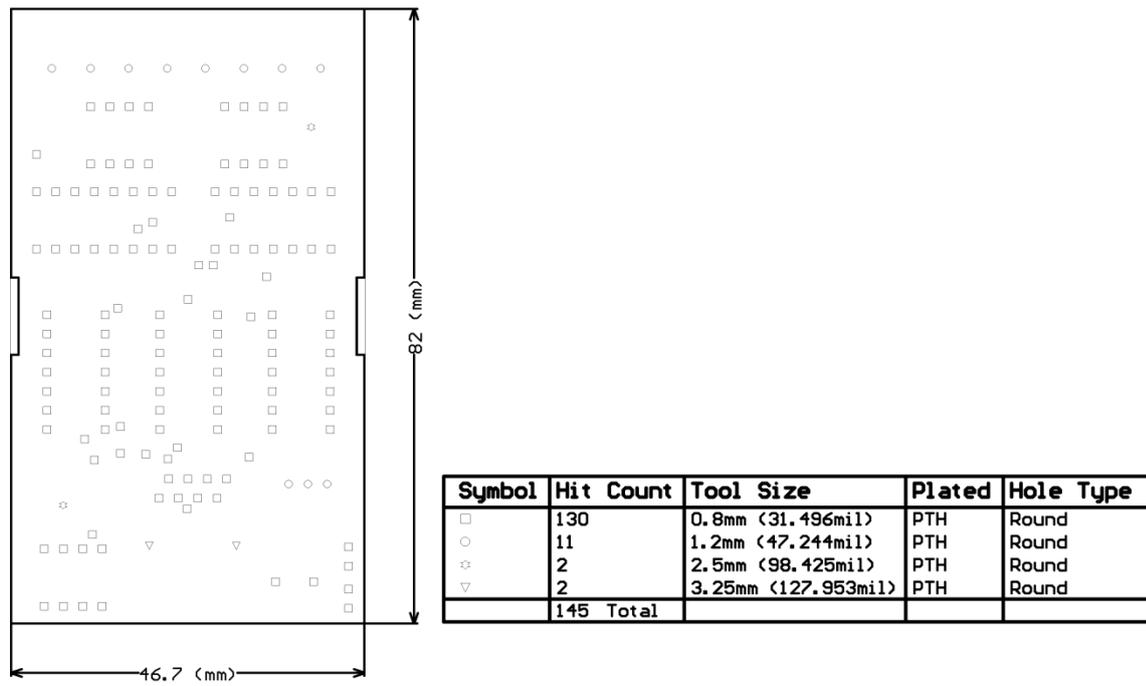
EXTENSION BOARD'S DRILL DRAWING LAYER.
